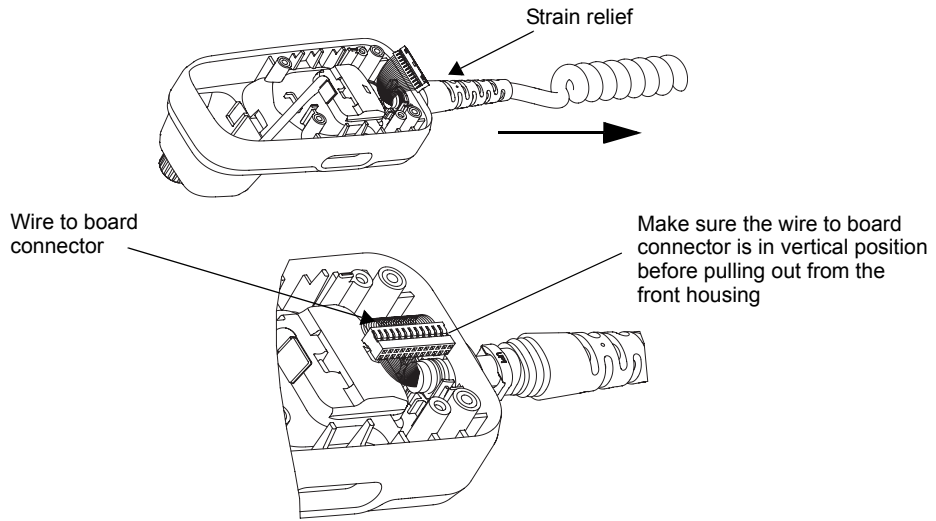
Spiral Cord Cable Removal from Front Housing
